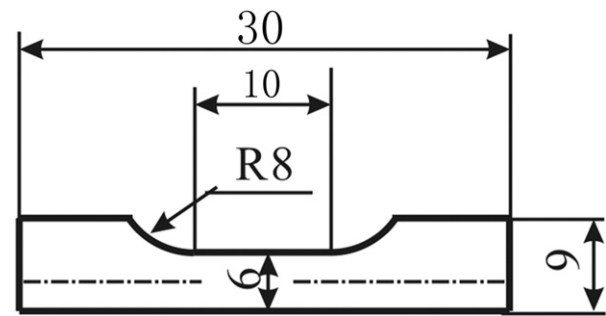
Schematic drawing and dimension of the tensile specimen (mm).
